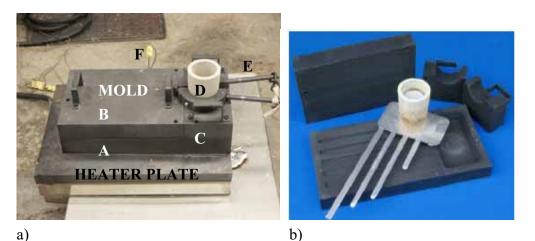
a) N-Tec mold and heater plate. The main components of the fluidity mold are: A drag, B cope, C gating system split in two semi-cylinders, D Kalpur sleeve held in place by E clamp ring, and F thermocouple in the drag; b) Open mold and a sample from a fluidity test. (Courtesy N-Tec Limited)
